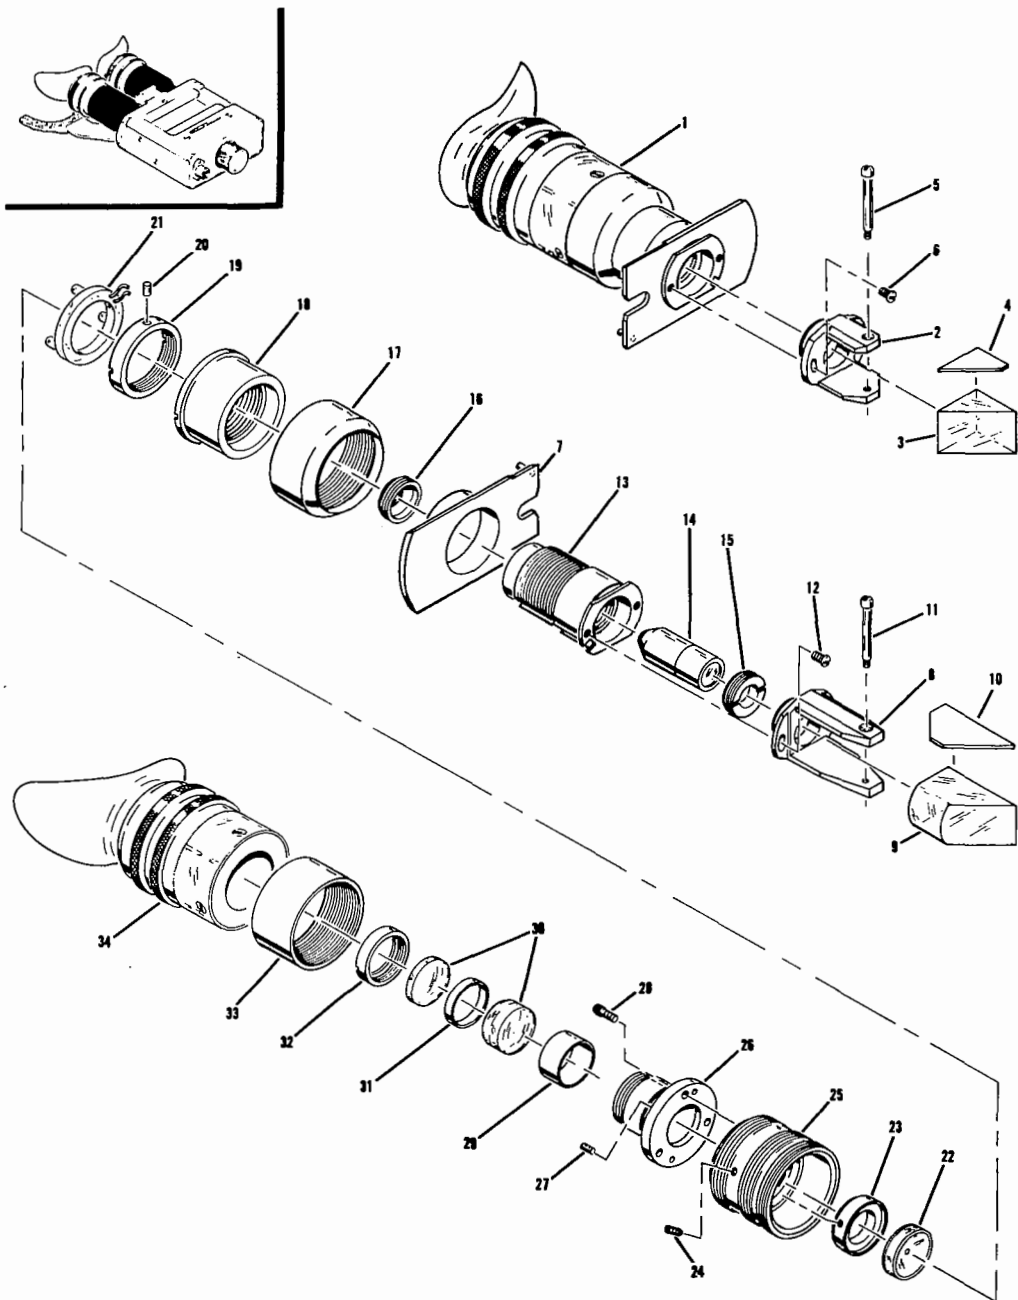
Inflight Vision Tester Eyepiece Assembly
